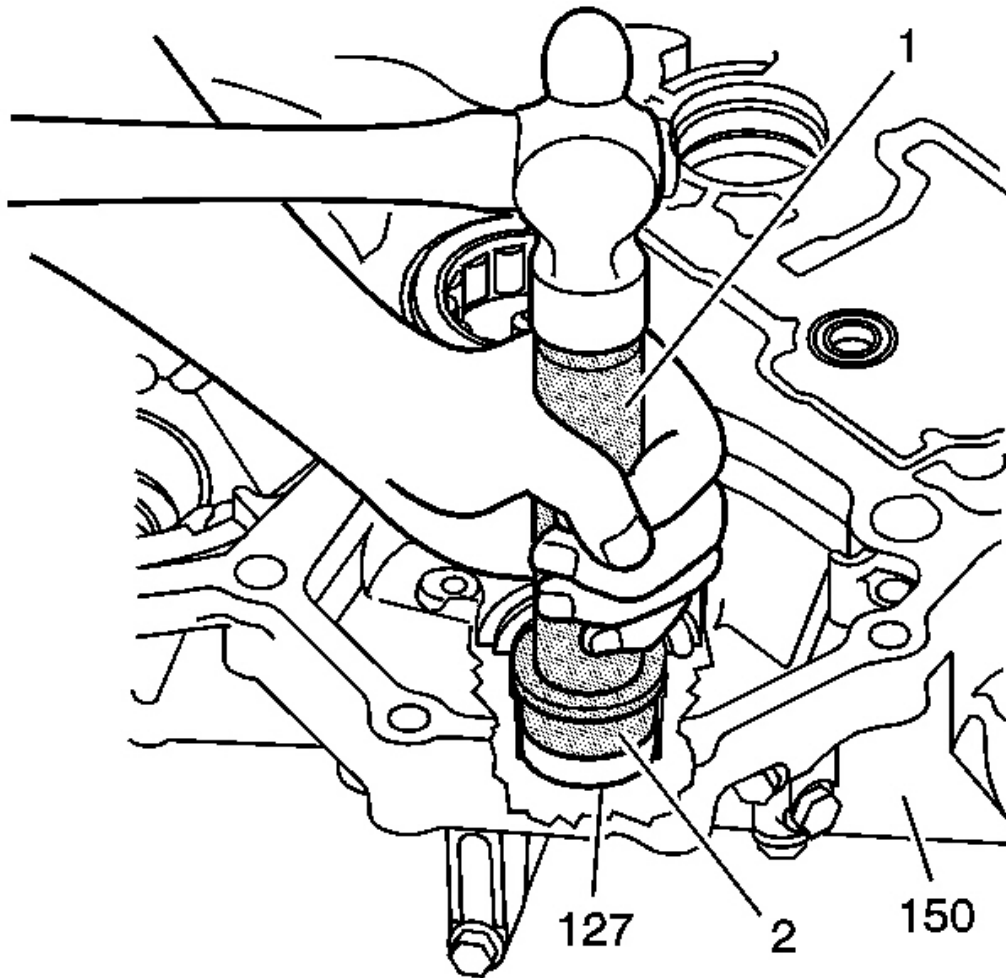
Installing The 1st/2nd Clutch Shaft Front Bearing Using DT 46412 & EN 46342
